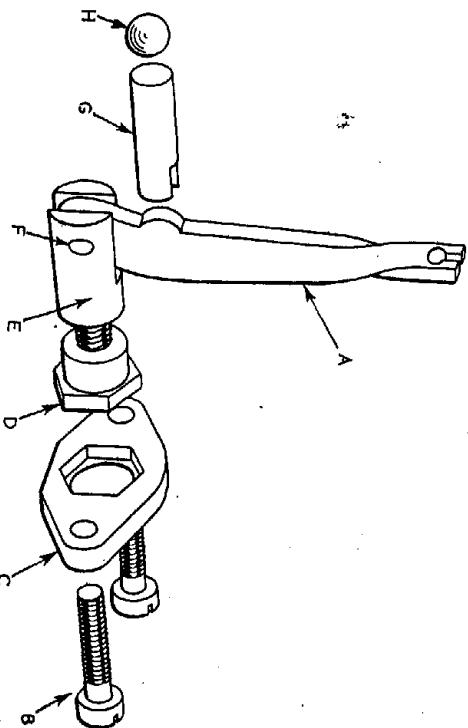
COMPONENTS OF THE CLUTCH RELEASE MECHANISM.
